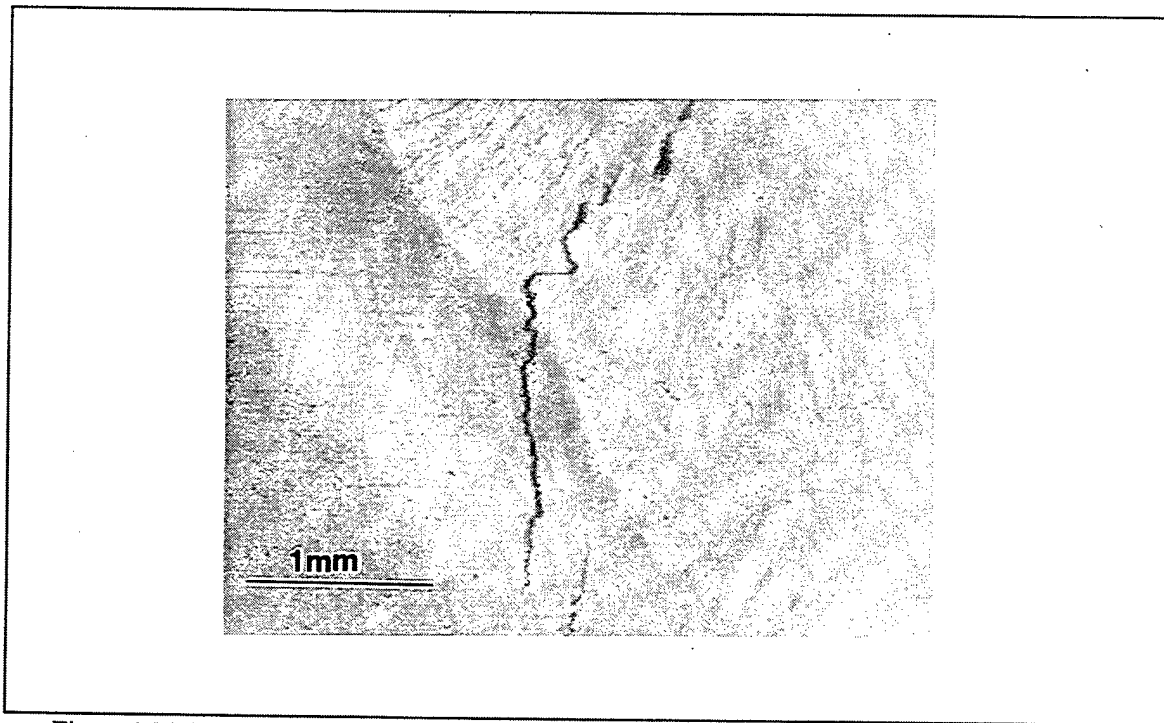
Lower crack in UWW10 weld sample from HAZ into the weld metal (See Figure 3.3).
